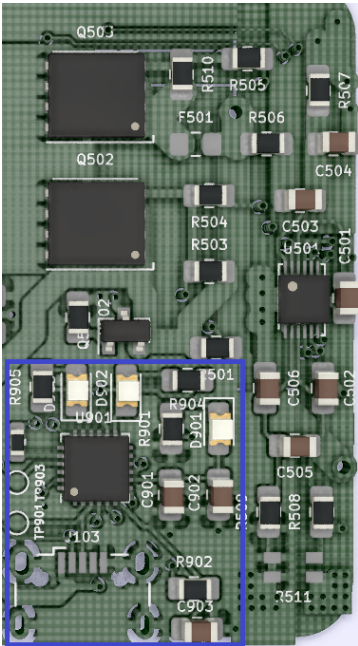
PCB design of the battery protection and USB to serial design in the blue box.
